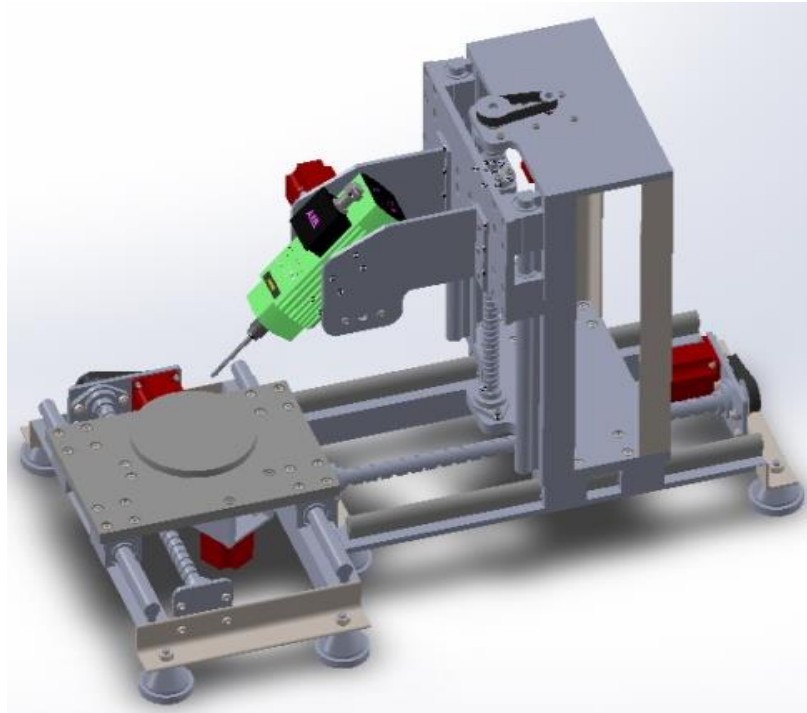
Detailed 3D CAD model of desktop CNC milling machine.
